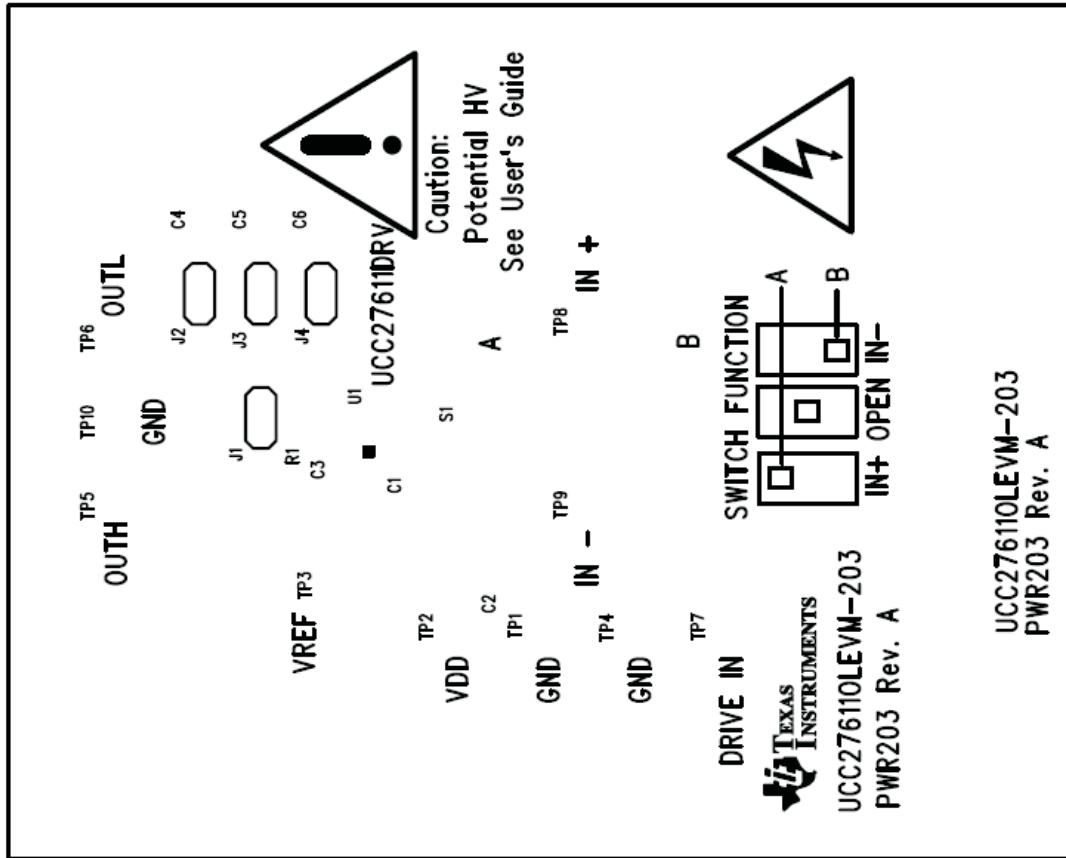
UCC27611OLEVM-203 Top Layer Assembly Drawing (top view)
